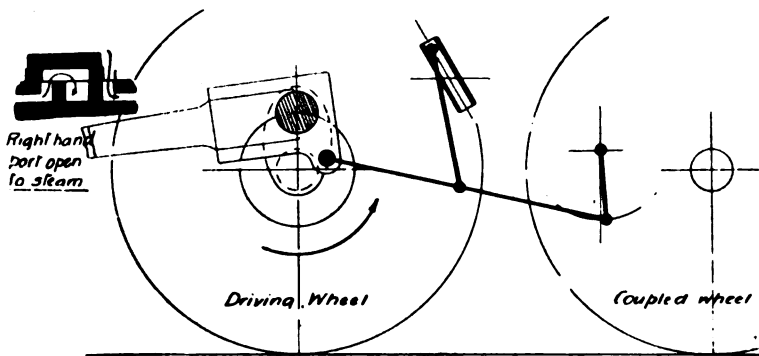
BIG END ON TOP CENTRE; RIGHT-HAND PORT FULLY OPEN TO STEAM.
